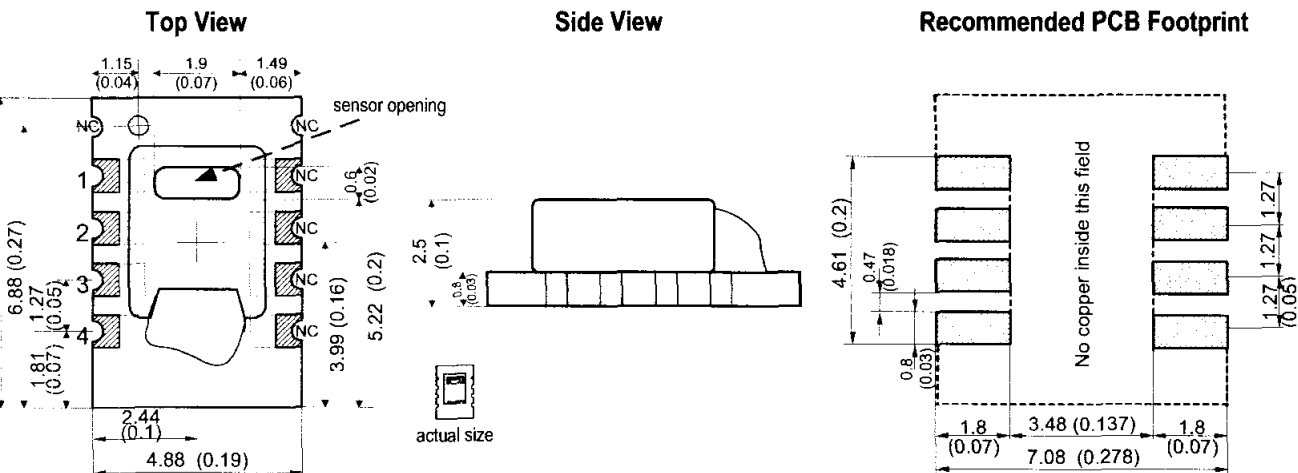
SHT1x drawing and footprint dimensions in mm (inch)
